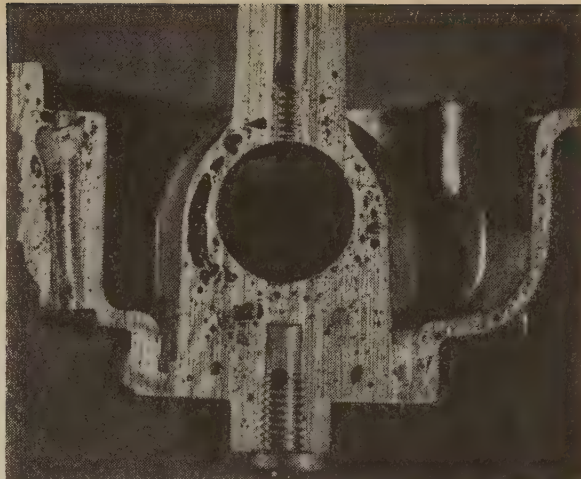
This aluminum diecasting illustrates the consequences of too low an injection speed. Raising the injection speed from 100 to 400 fpm eliminated the porosity and produced pressure tight castings.
